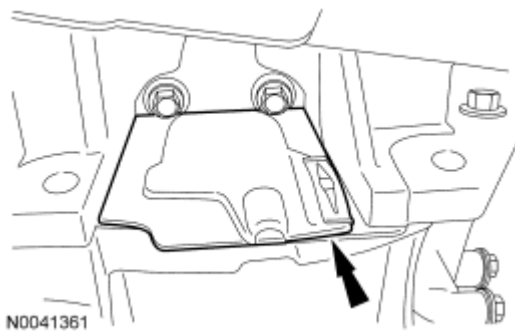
Locating Transmission Fluid Cooler Hoses
